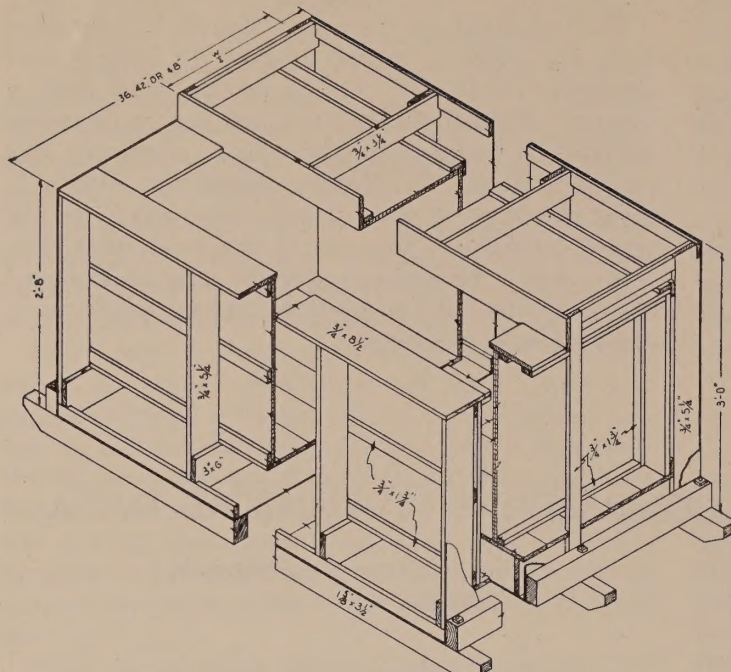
Skeleton view of a 30 cu-ft home-built frozen food unit showing framing construction.
